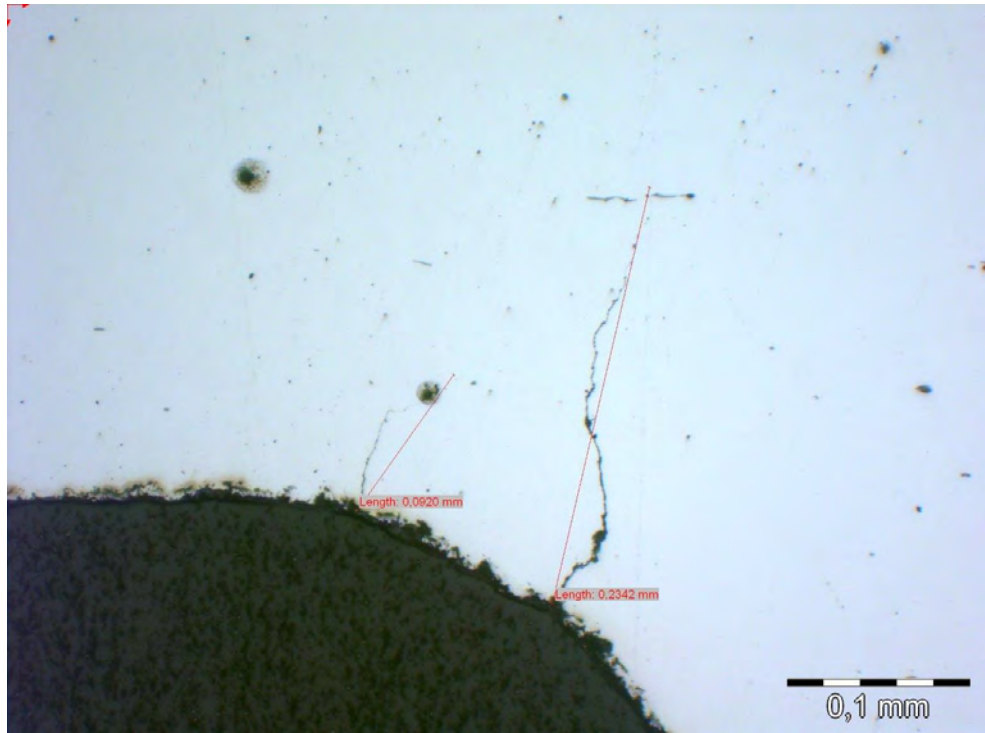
Cut three in crack at segment A, second ridge on barrel no. SFK 0120-A
